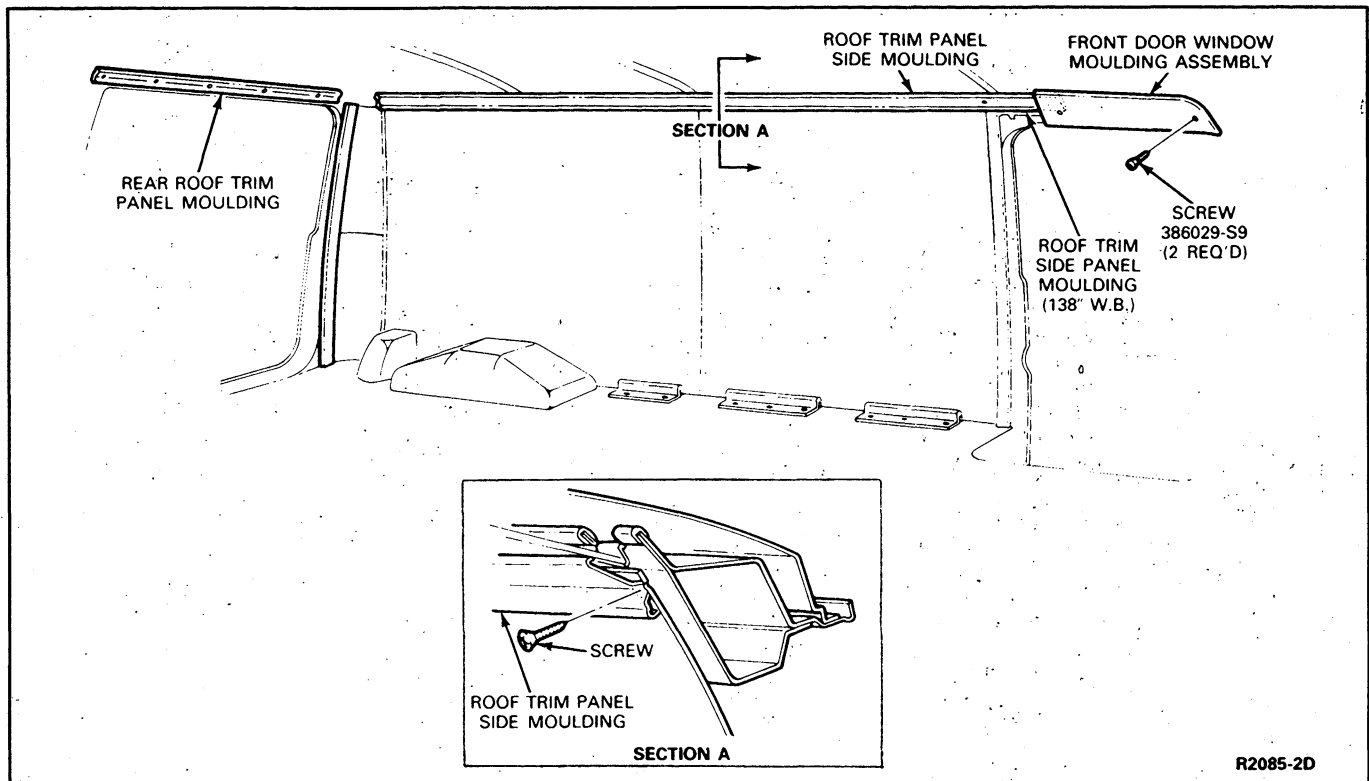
Right Side Interior Mouldings—Optional 124 and 138 Inch W.B.—Left Side Similar—E-150—E-350
